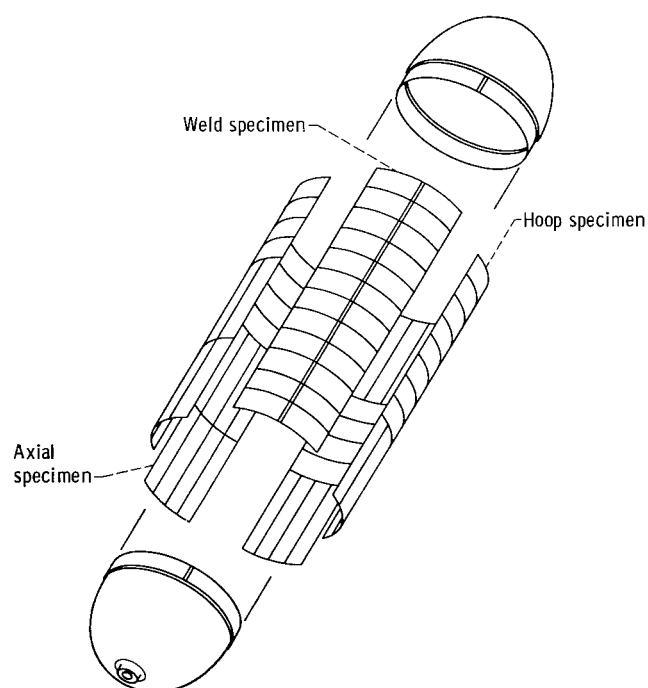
Cutting of tensile coupons from cylindrical tank.
